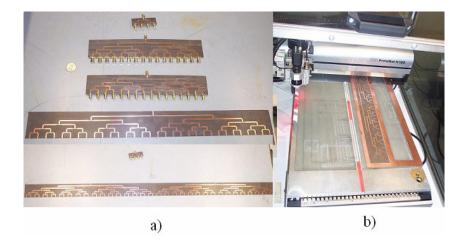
(a) Prototypes of corporate feeds (b) Milling machine at UPRM
